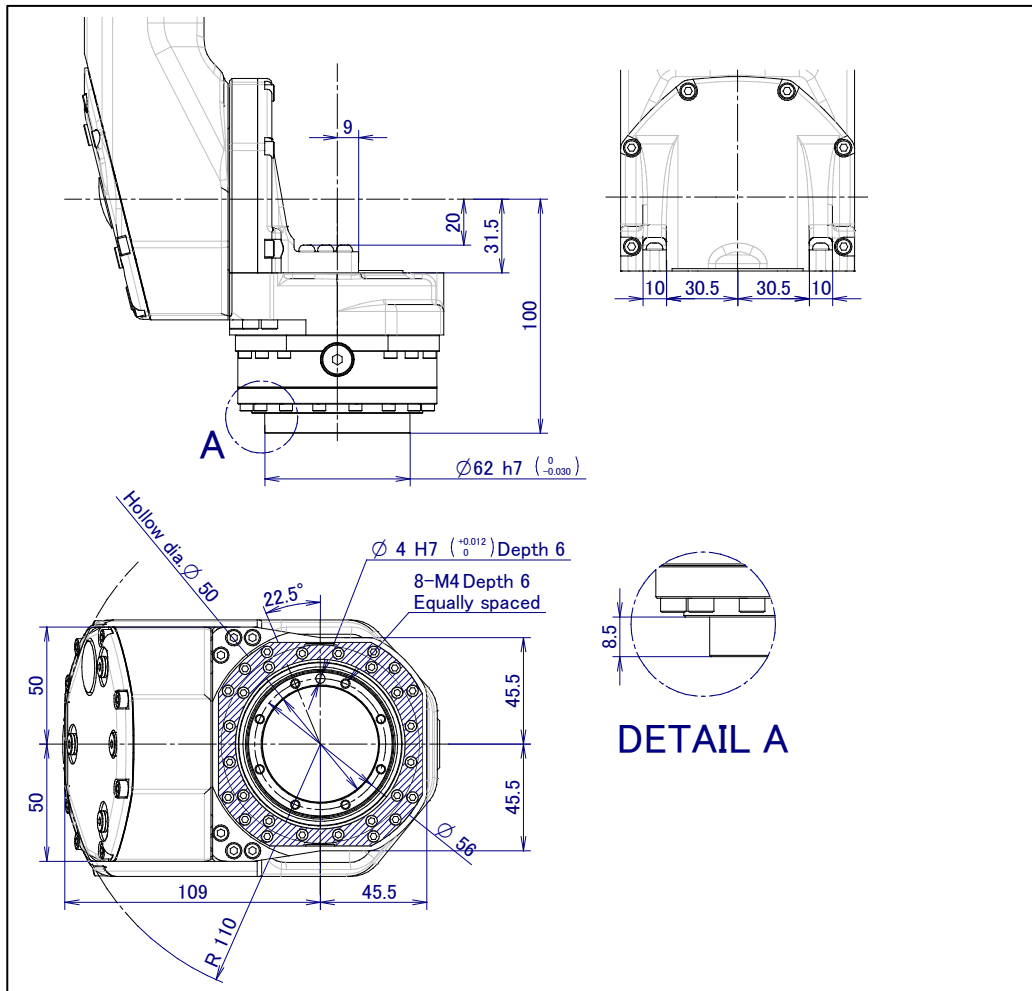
(b) Mounting surface for the end effector (M-710iC/12L)
